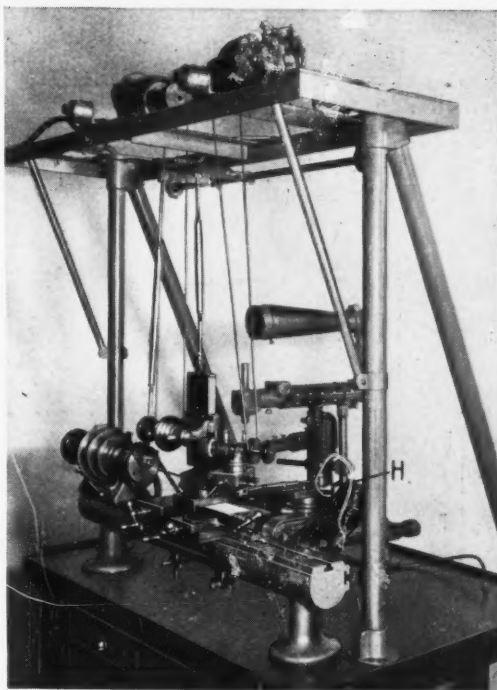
The drive at H provides an oscillation of the third headstock, the amount of which can be adjusted at an adjustable crank pin, making it possible to generate spherical surfaces
